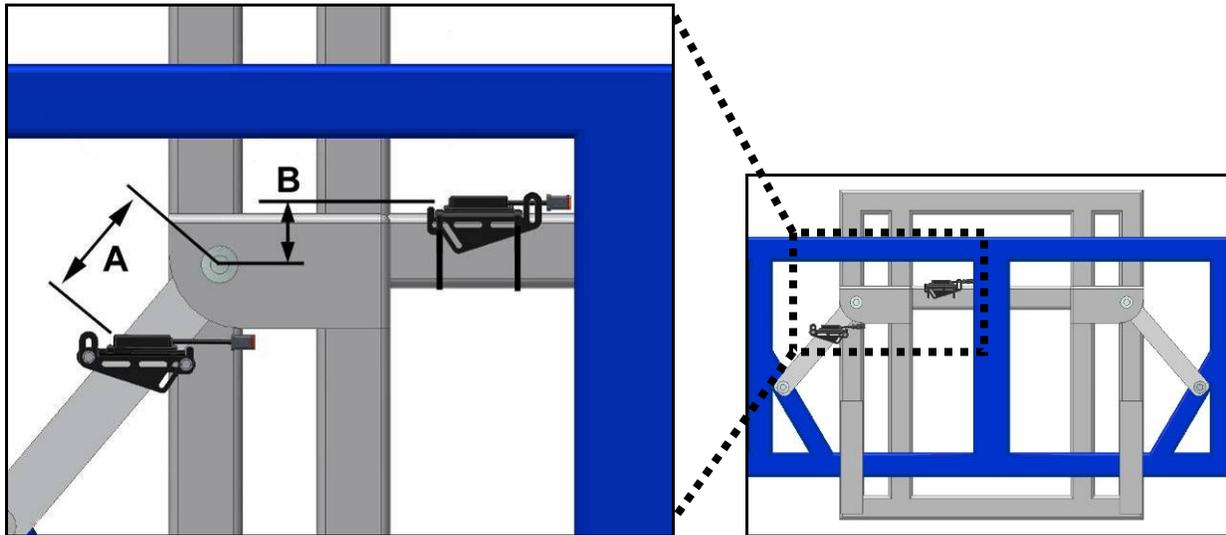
Roll Sensor Mounting on a Trapeze Suspended Boom
